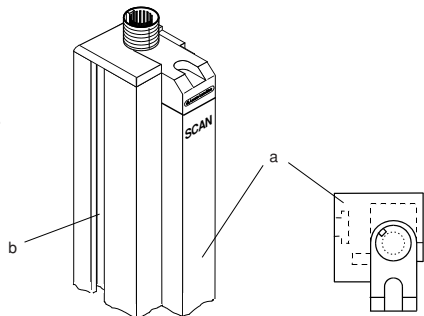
Mounting using the SCAN Protective Mounting Profile
